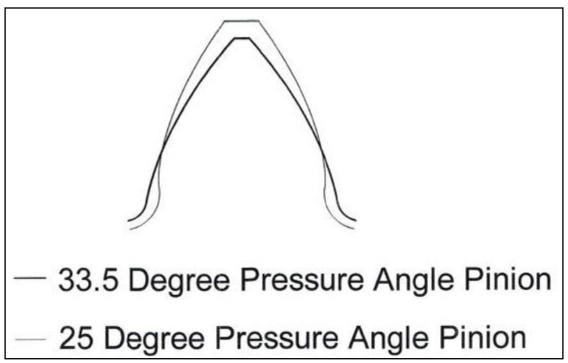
Reference 25 PA and 33.5 PA gear tooth profiles.
